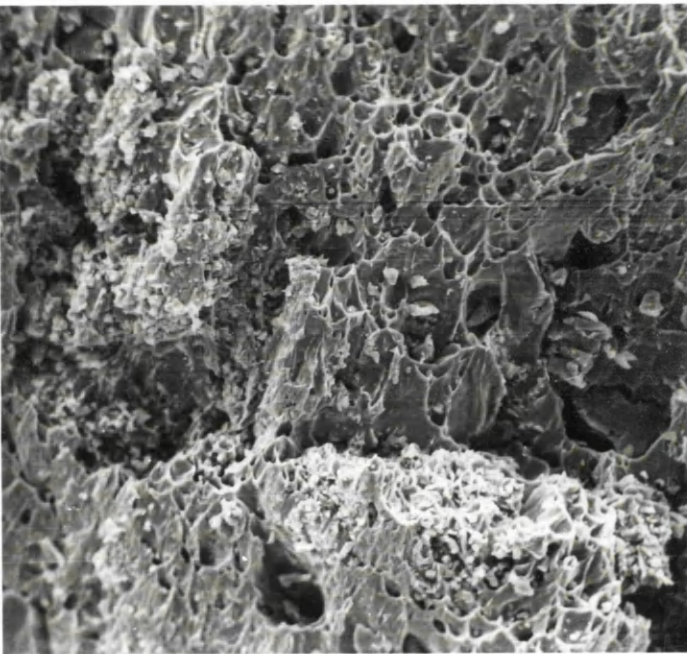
Fracture surfaces of NC 100.24 iron powder pellet forgings produced from preforms of
